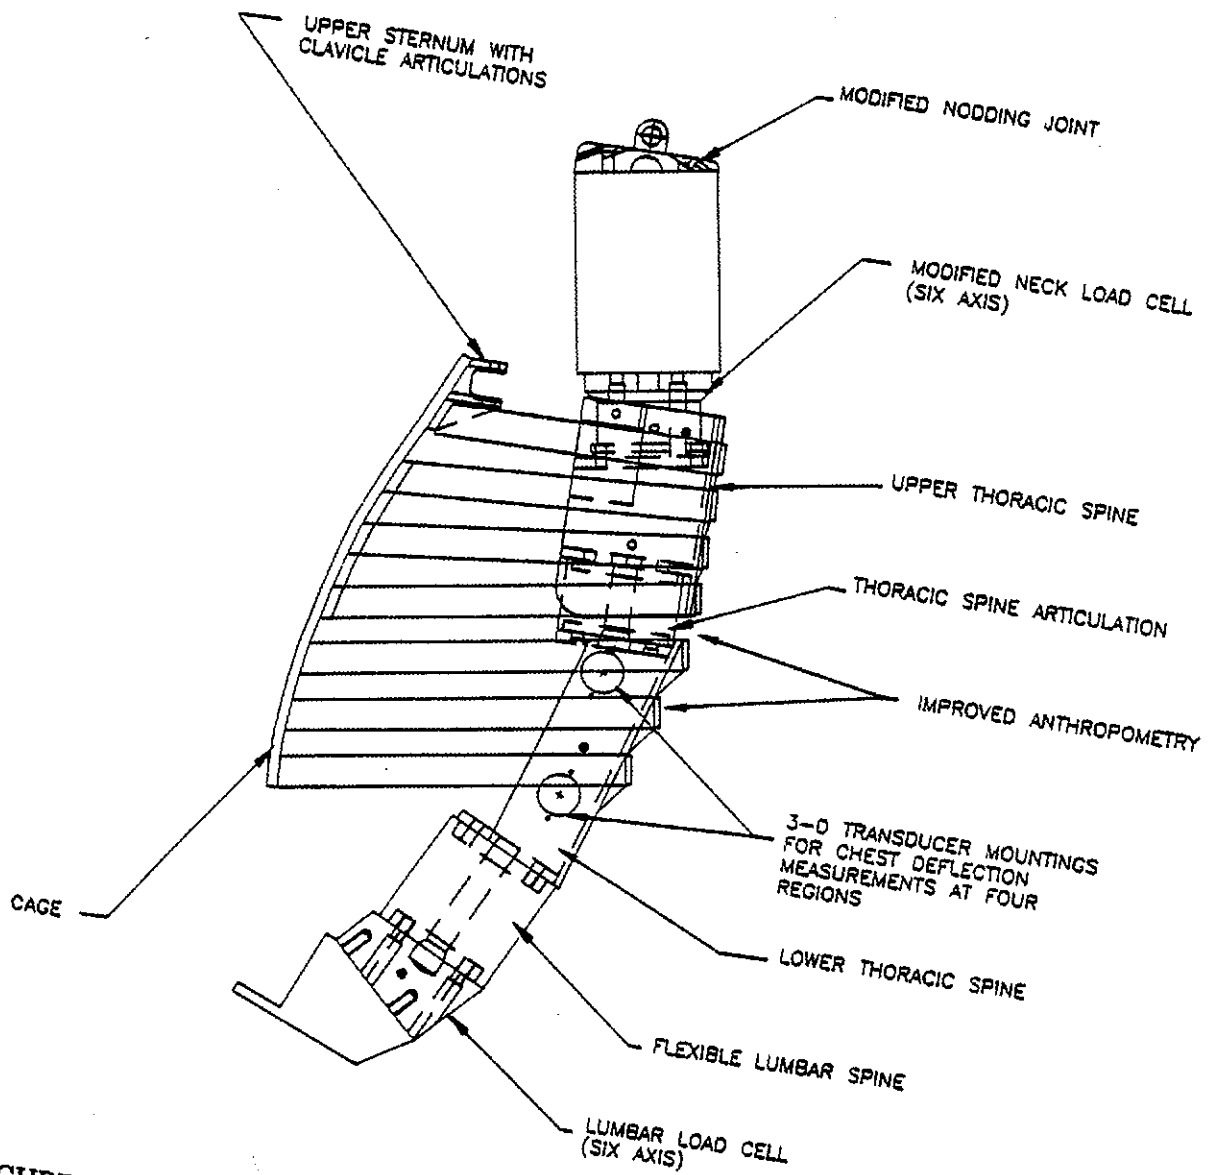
Side-view drawing of final prototype assembly (shoulder omitted for clarity).
